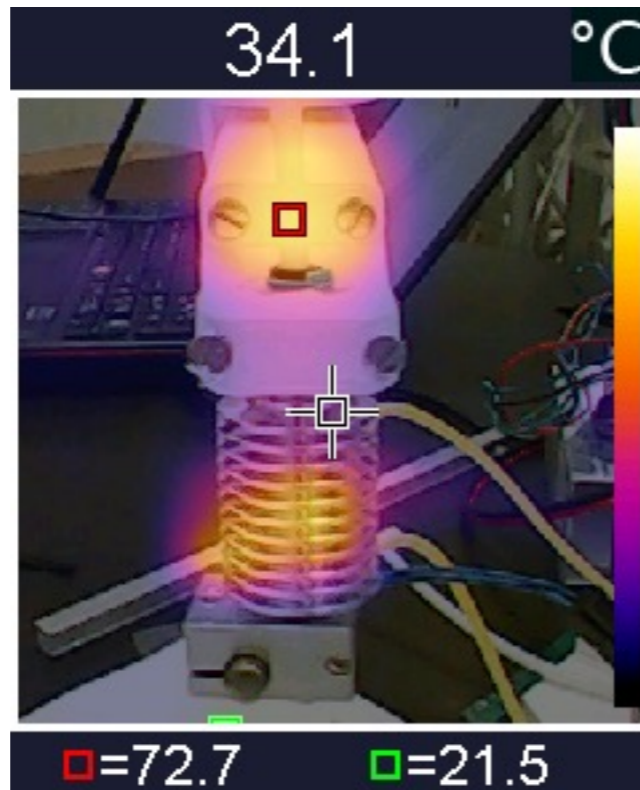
IR photo taken of the hot end mount during the dry run test, the heat creep reaches the cold end part and the mounting system.
